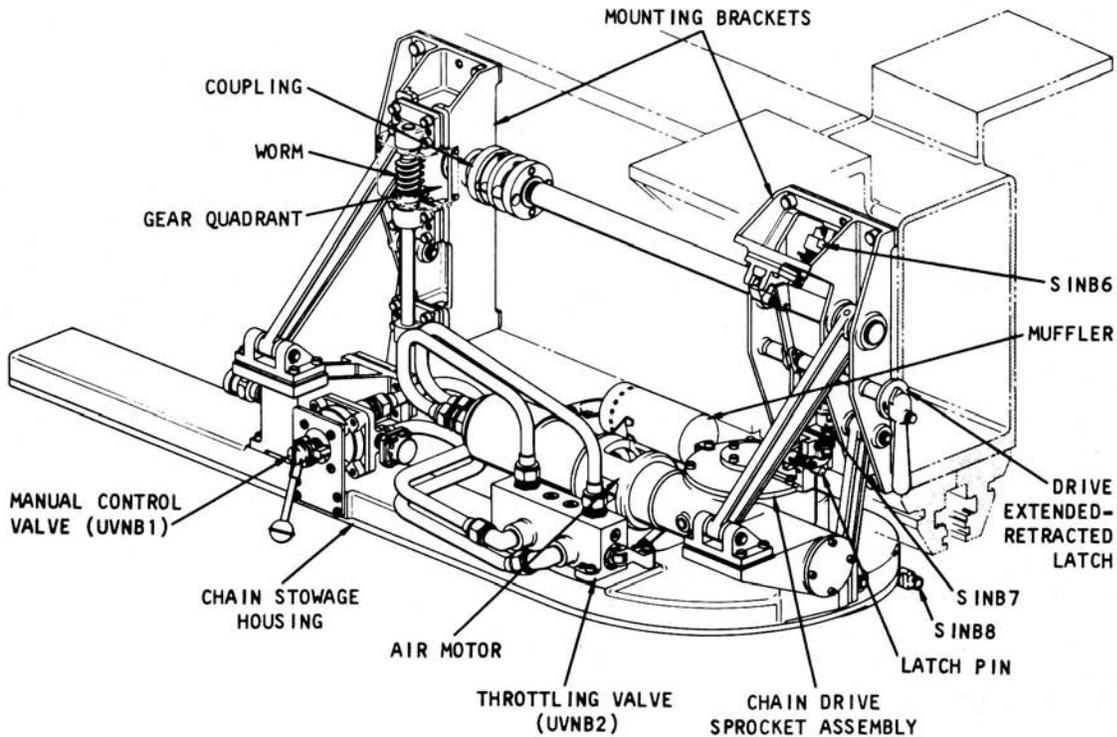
Adapter loading fixture assembly (for Asroc).
